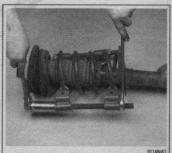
Tighten down the nuts on the top of the forcing screws on this type of spring compressor
